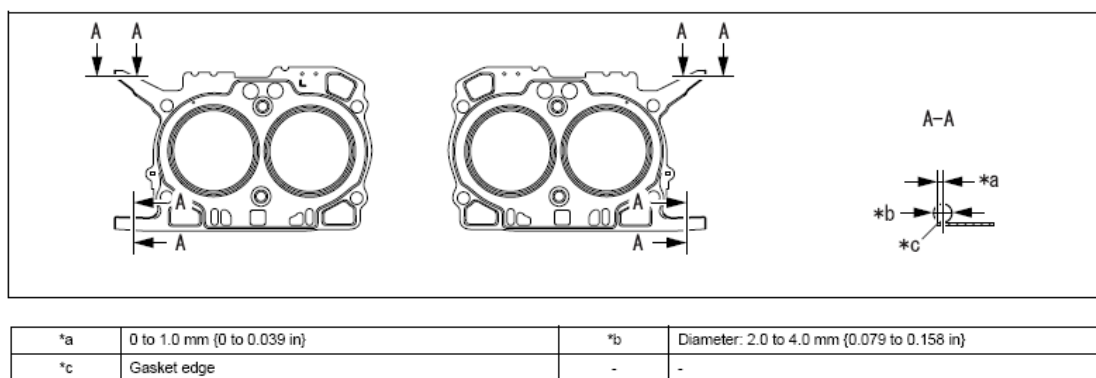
Identifying Three Bond 1217G Applying Area On Cylinder Head Gasket
